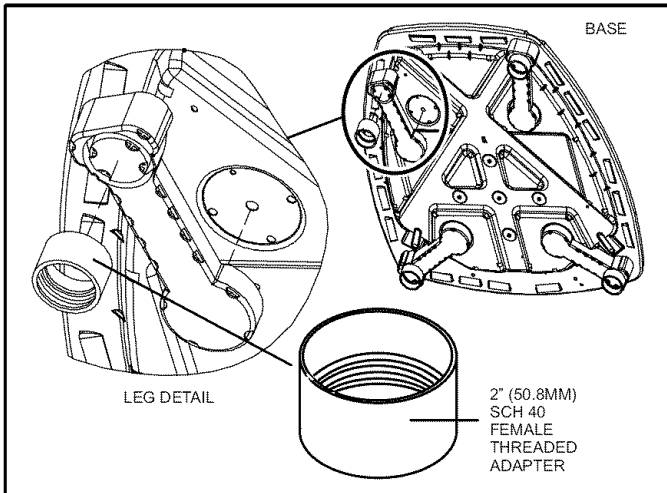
Elevated Slab Mounting using Feet Extenders (Larger Base Units)
